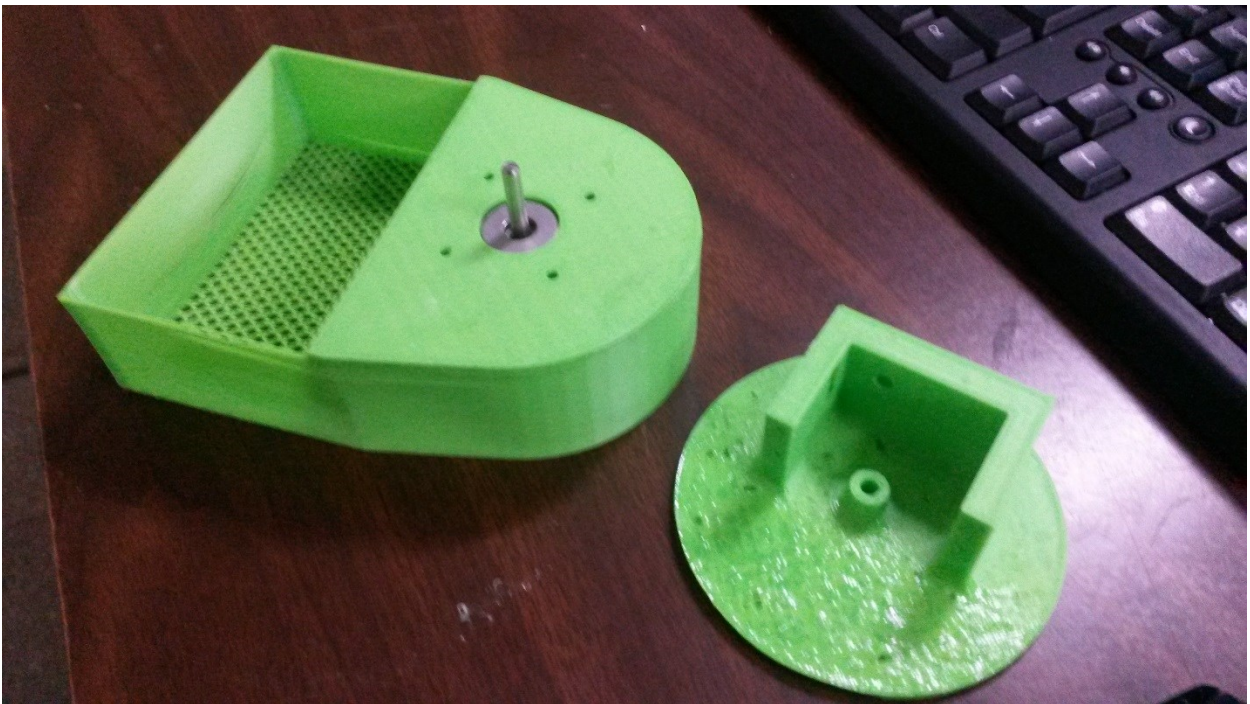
3D PRINTED PARTS FOR ARM GROUP
